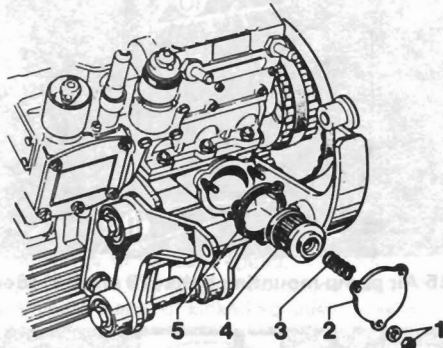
Exploded view of fuel injection pump oil filter (Sec 28)
